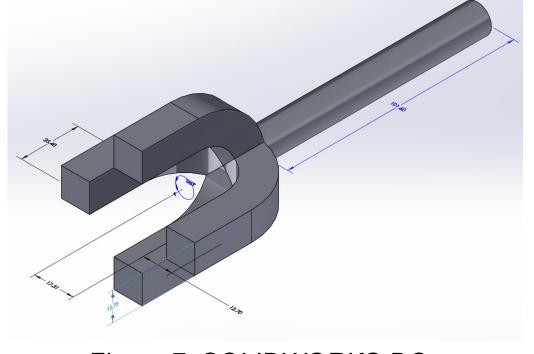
SOLIDWORKS DC Motor Attachment Drawing
